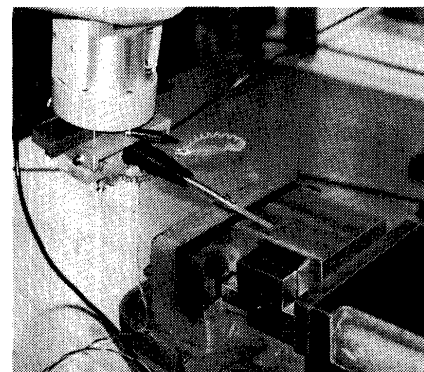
Photo taken during polishing with the ultrasonic vibrational tool
